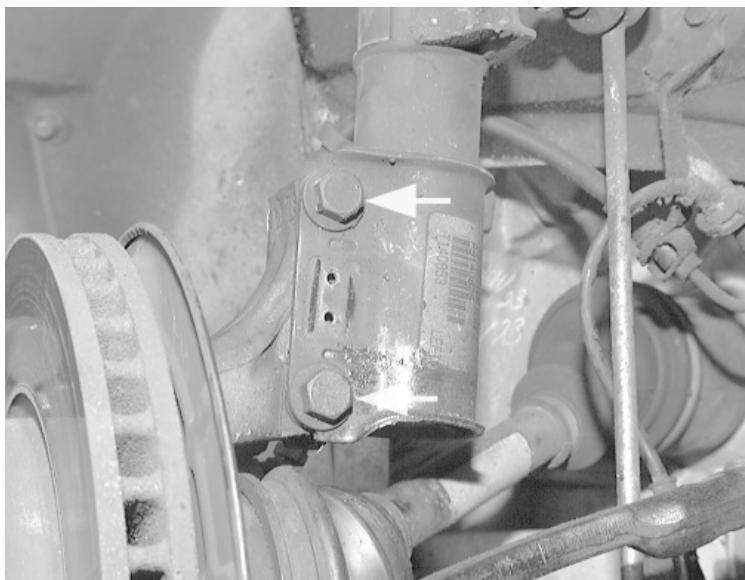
The strut is attached to the knuckle by two bolts (and nuts)
